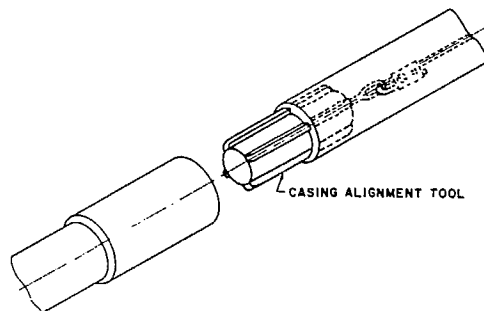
Casing alignment tool positioned for the connection of two casings.
